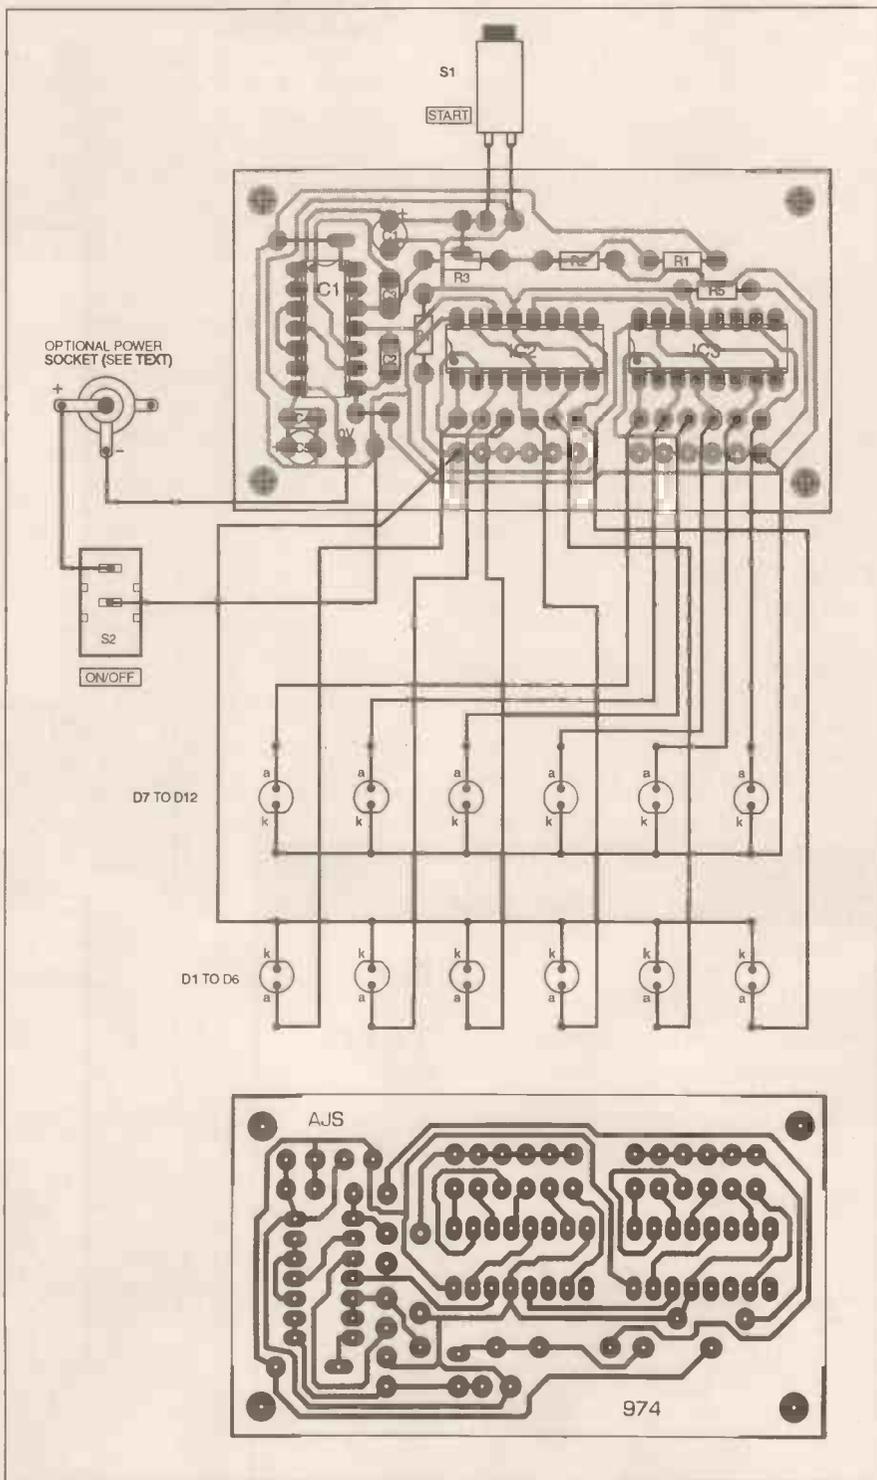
Printed circuit board component layout, interwiring and full size underside copper foil master pattern. The spare copper pads, below IC2/IC3, can be used for direct board mounting of the l.e.d.s.
